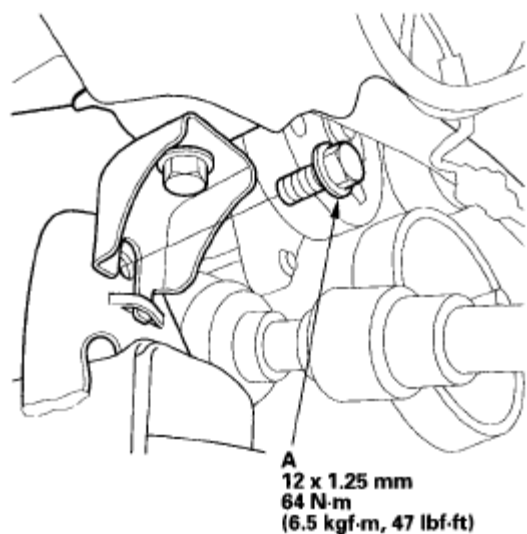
Identifying Front Subframe Middle Mount Bolt On Right Side (With Torque Specifications)
